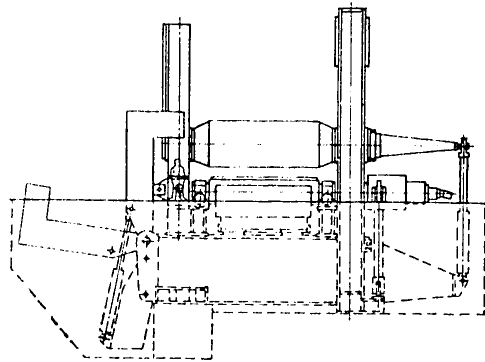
Sheet bending machine with 6,300 ton-force on top roller.
